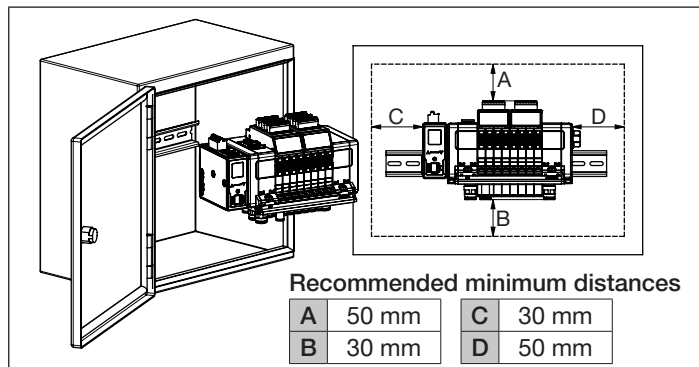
Recommended minimum distances for assembly on standard rail in the control cabinet
